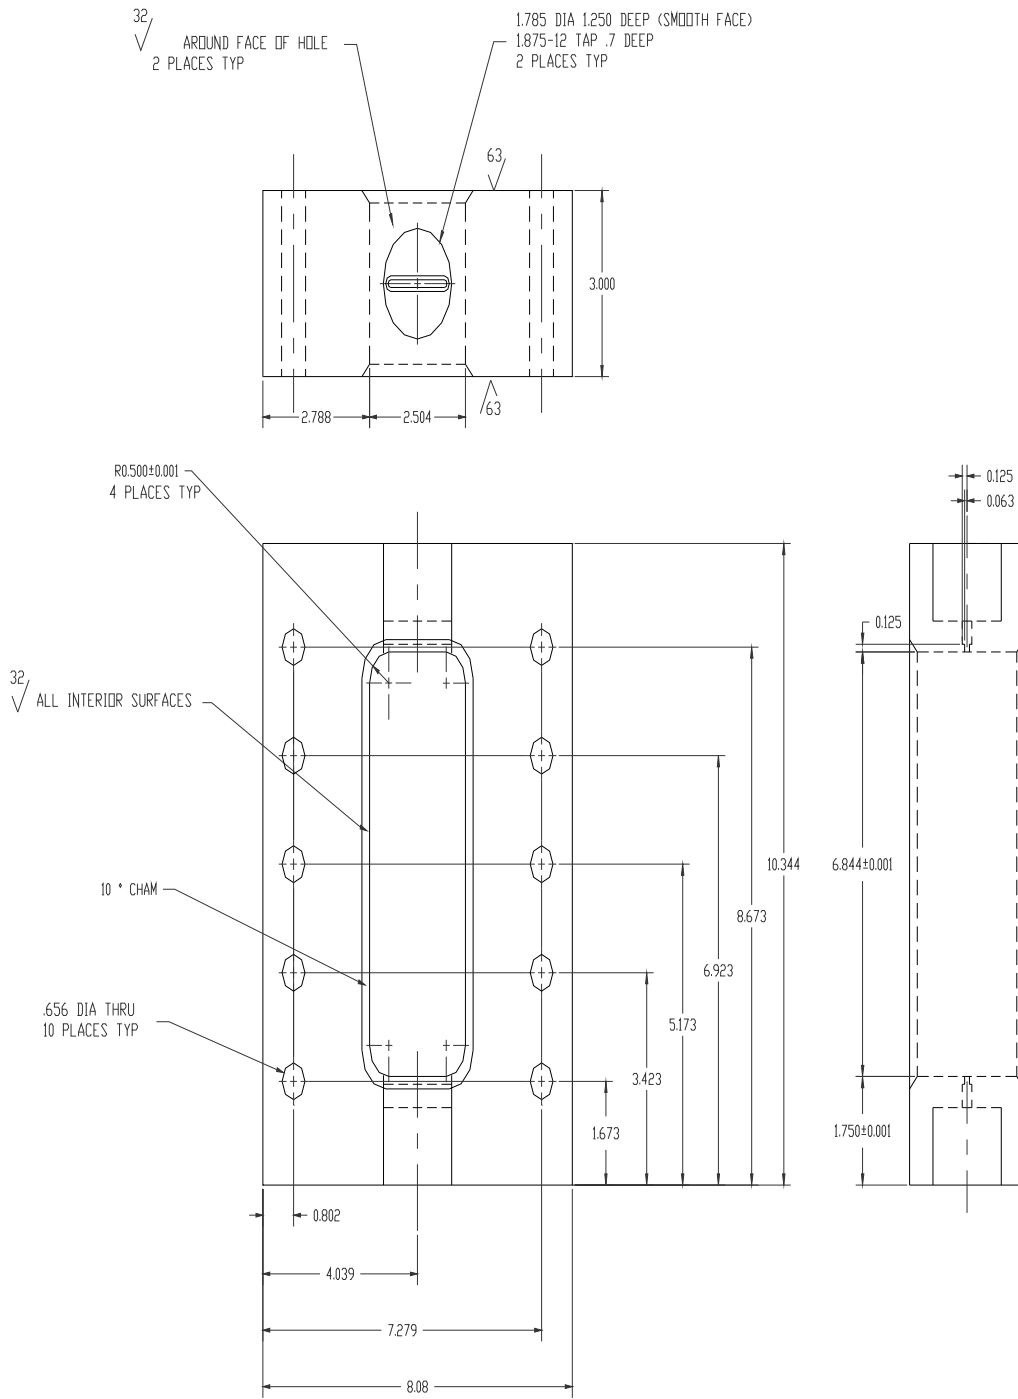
Detailed drawing of the boundary vessel-Hess [20]
